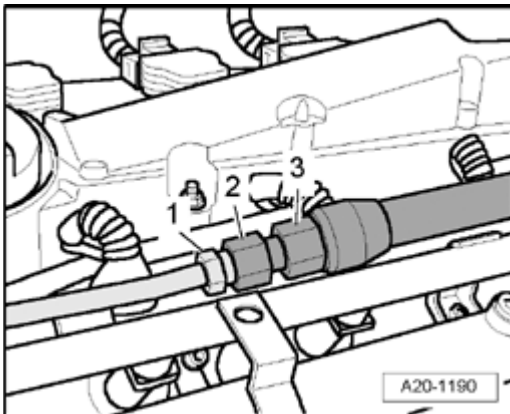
Counterholding Using An Open-End Wrench At Each Hex Head & Unscrew Union Nut
